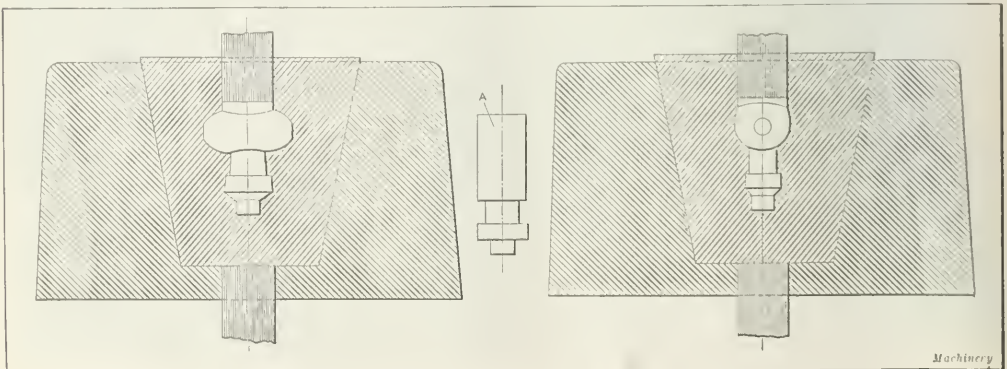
Example of Split Die used for making Watch Pendant and Blank A from which this Piece is pressed
